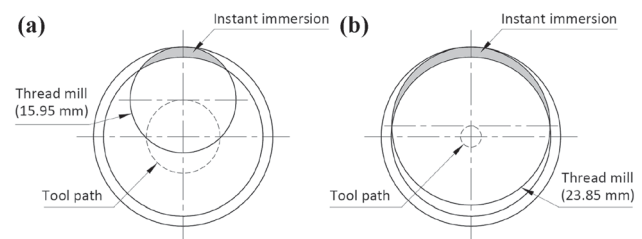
The instant immersion of the thread mill: (a) thread mill diameter is 15.95 mm, (b) thread mill diameter is 23.85 mm.
